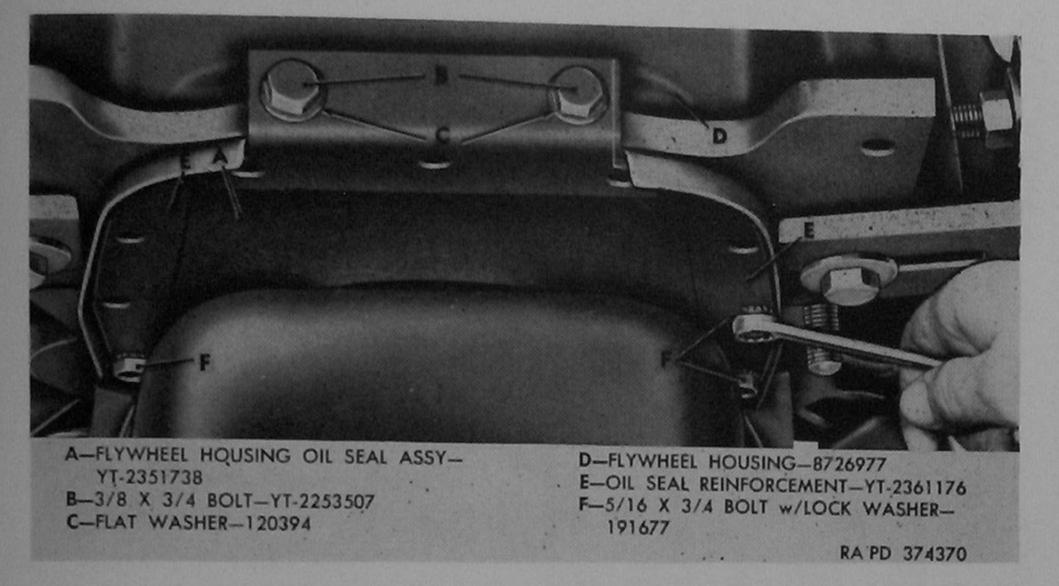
Installing flywheel housing oil seal assembly on engine assembly 8726920.
